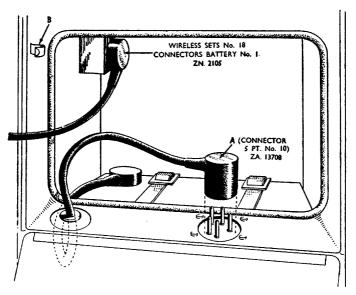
UNDERSIDE VIEW OF CHASSIS
